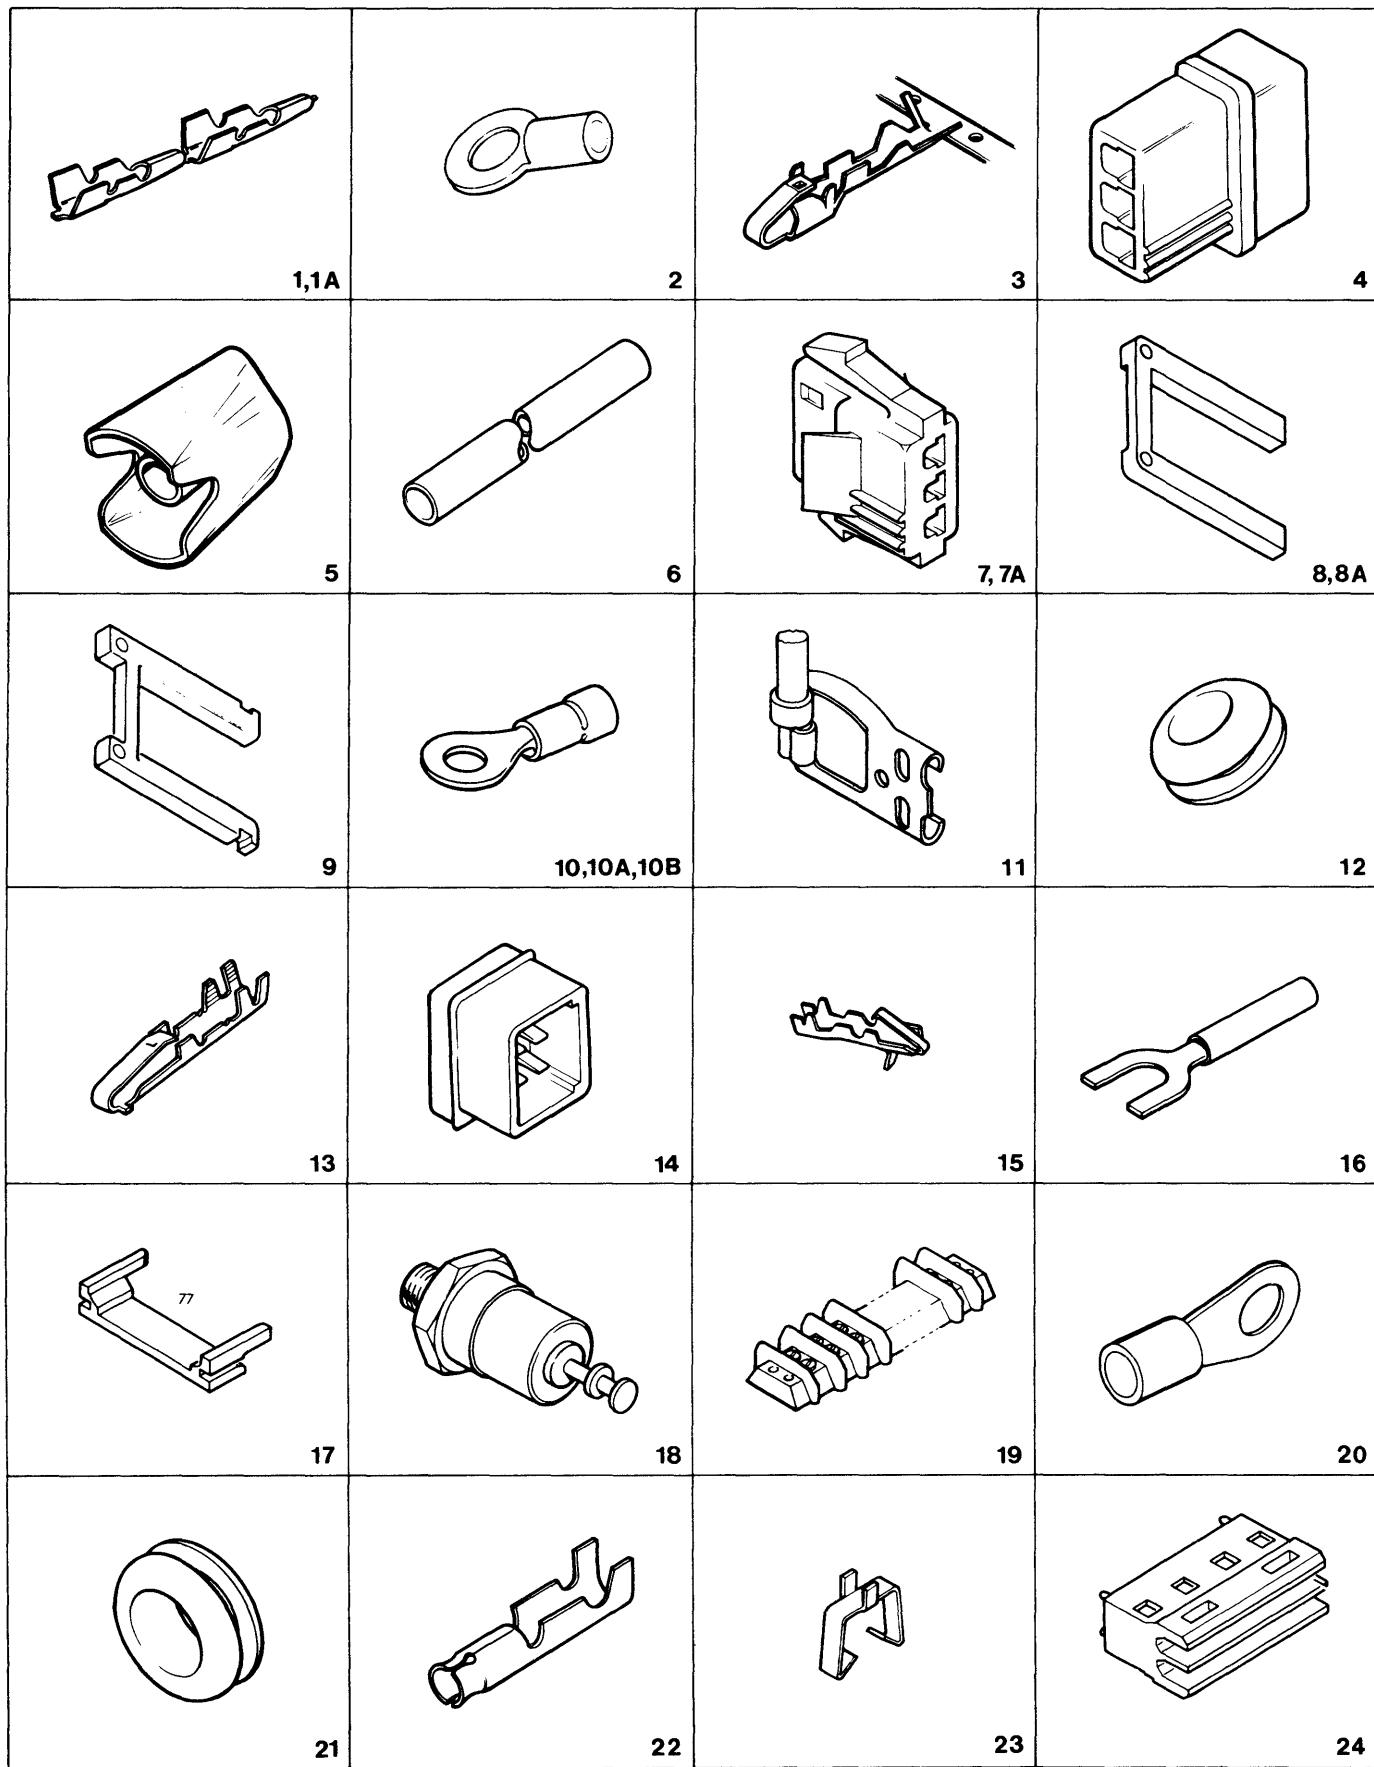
CABLE AND JUMPER ASSEMBLY COMPONENT PARTS (PART 1 OF 2)
